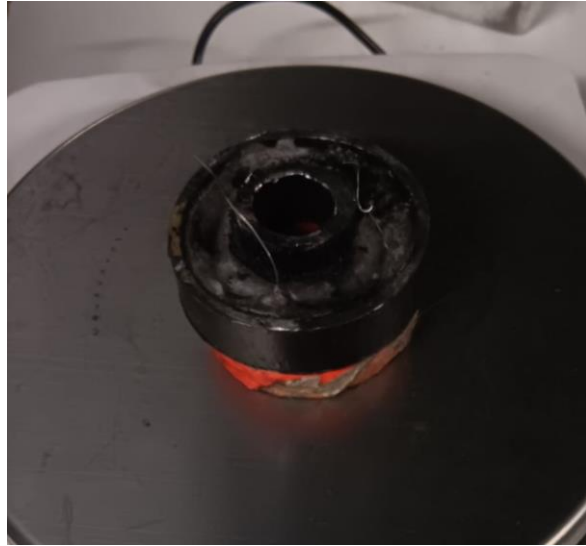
Solidified fuel grain inside the combustion chamber.
